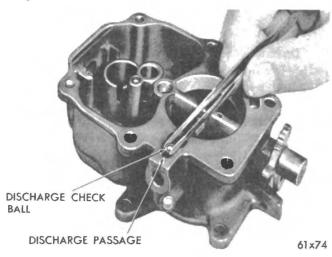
Installing Accelerator Pump Discharge Check Ball.
